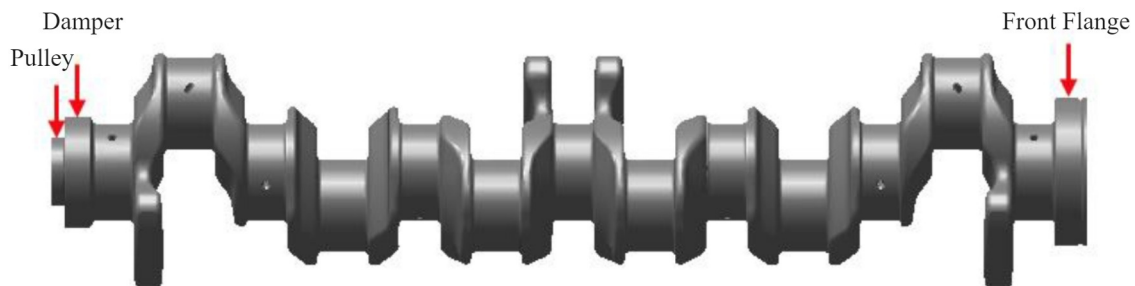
Allowed crankshaft surface repairs with spray welding and brush plating
